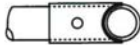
BOLTED ROLLBAR JOINT (Where Permitted)
